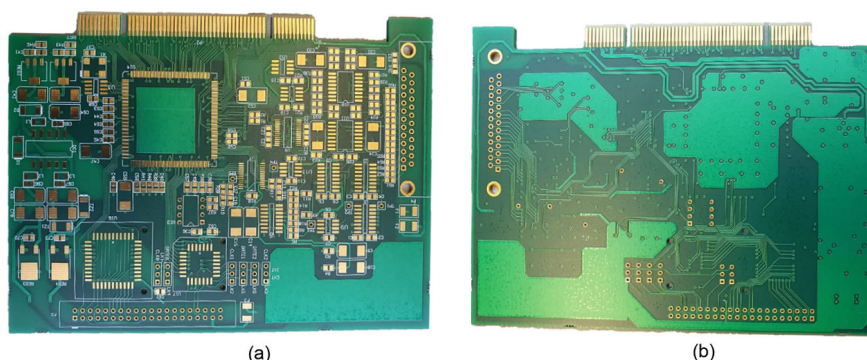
(a) Top-side of the PCB (b) Bottom-side of the PCB
